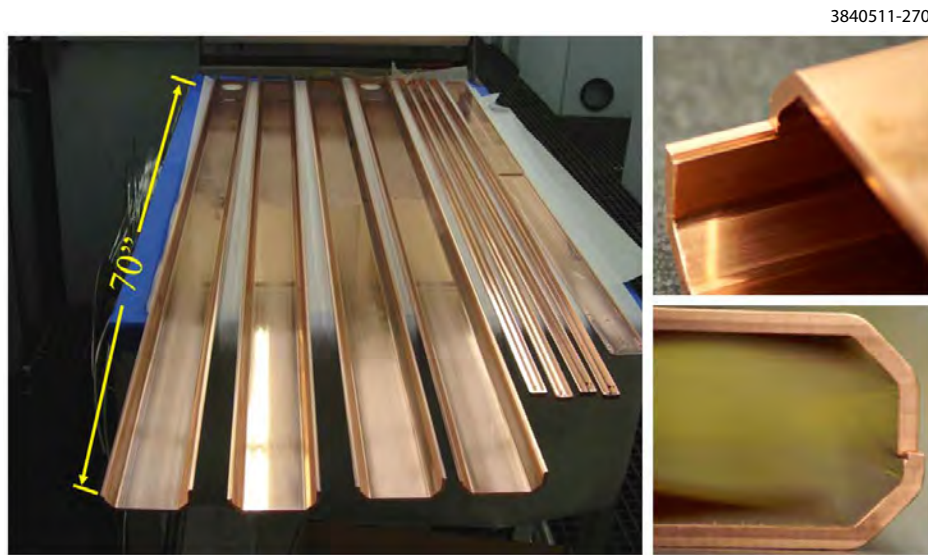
The copper beam pipes are split into two halves with EB-weld preps ready for cleaning and EB-welding. (Photos: courtesy of Dawn Munson of LBNL)
